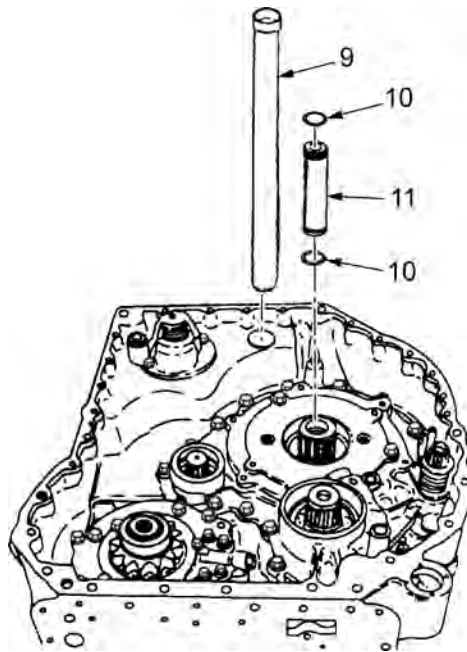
Brake Coolant Tube Packing and Sump Communication Tube Removal.
